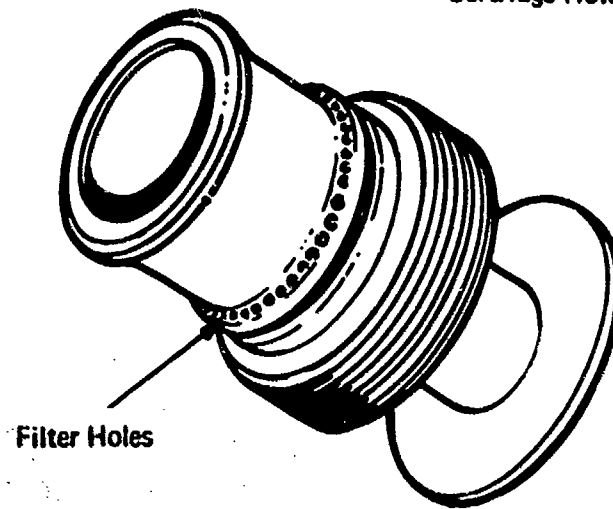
VIEW OF E.R.U. WITH COVER PLATE REMOVED
